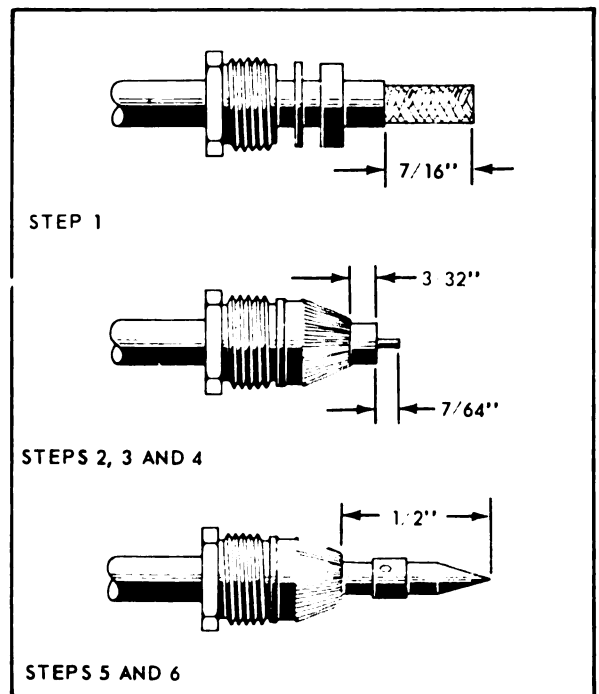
Attaching Avien 163-088 and 163-089 Connectors to Coaxial Cable
